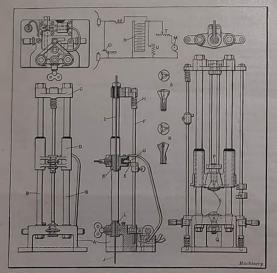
Plan, front and sectional elevation of portable percussive welding machine and connections. Two types of machines are shown,
